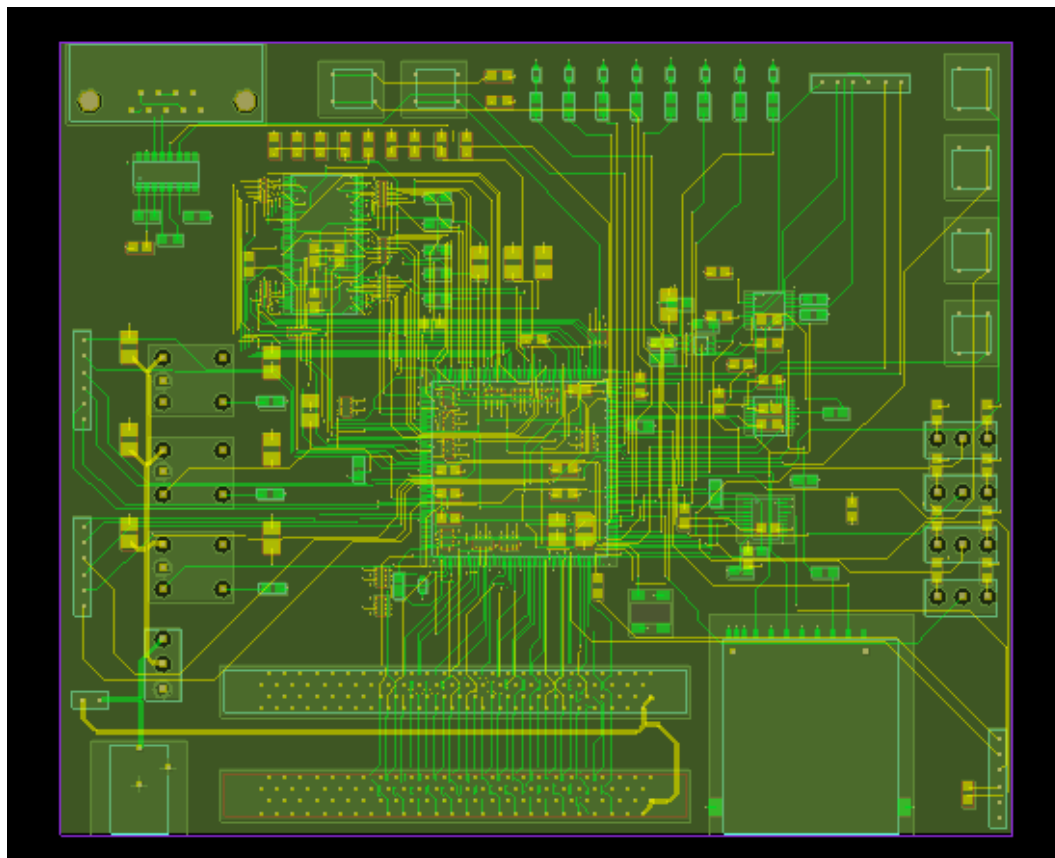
Allegro PCB Editor - Automatically Routed Board Example
